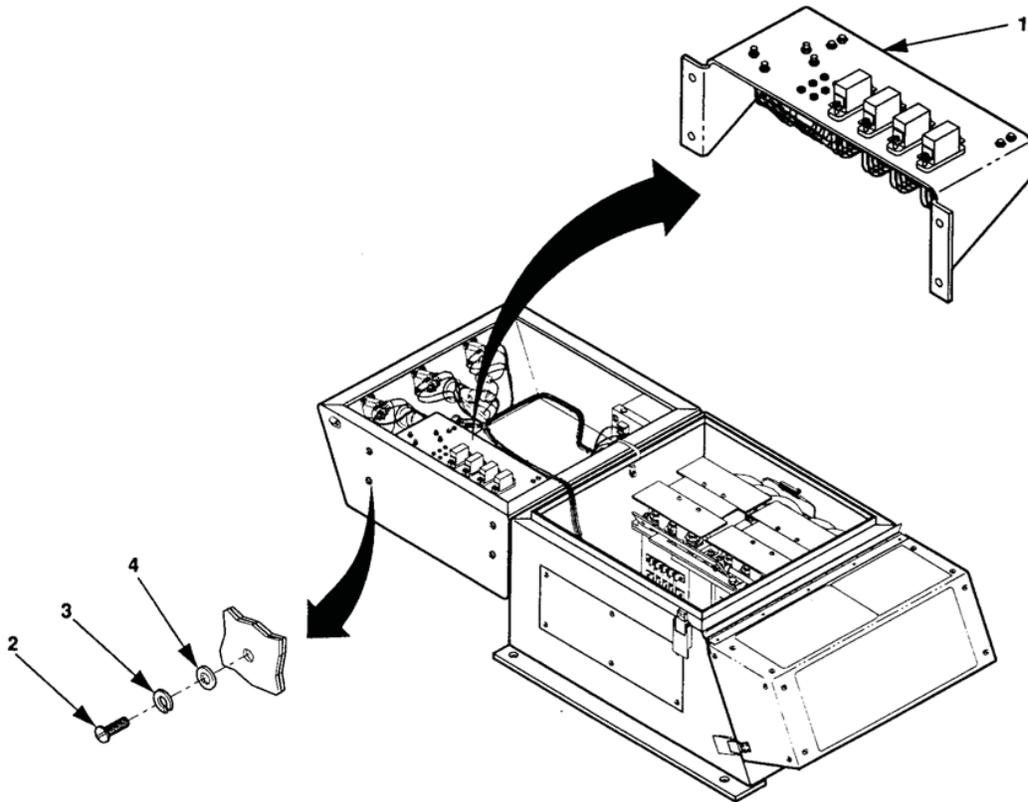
Switch Box Relay Board Assembly (Old Configuration).
